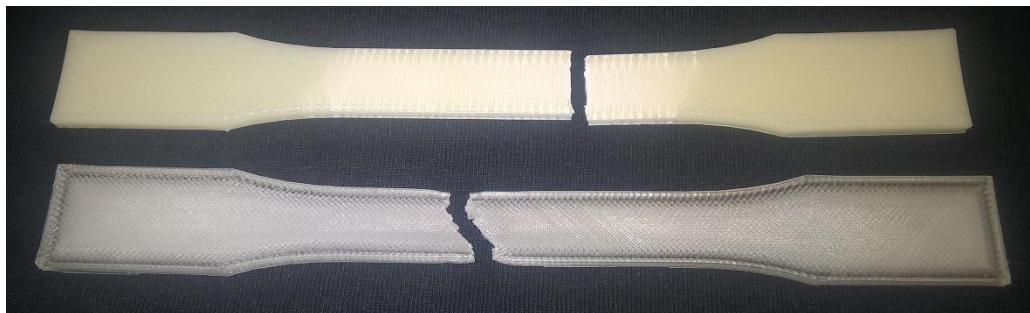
Fracture surface location of an ABS +/- 30° build orientation specimen, shown above, and a +/- 45° build orientation PC specimen, shown at the bottom of the image. The +/- 30° ABS specimen exhibits perpendicular cross-section failure. The +/- 45° PC specimen exhibits weld interface failure.
